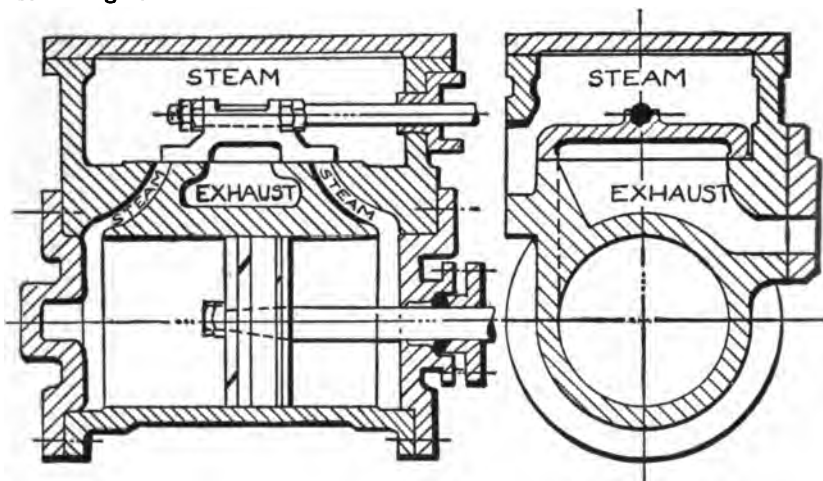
SEC. 3.—Sectional view of plain slide-valve engine, showing the cylinder and valve-chest.
